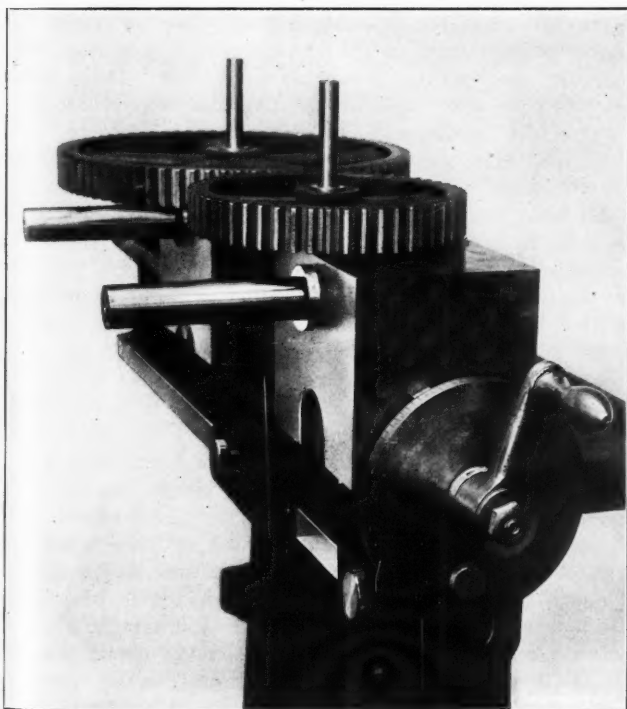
Detail View of Gear Tester showing Gears on the Vertical Arbors, and Micrometer Disk for Fine Measurements
